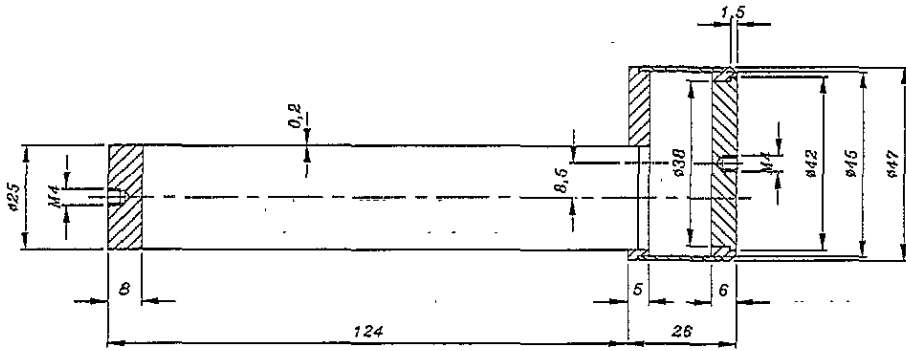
Drawing of the niobium sample cell. Dimensions in mm.
